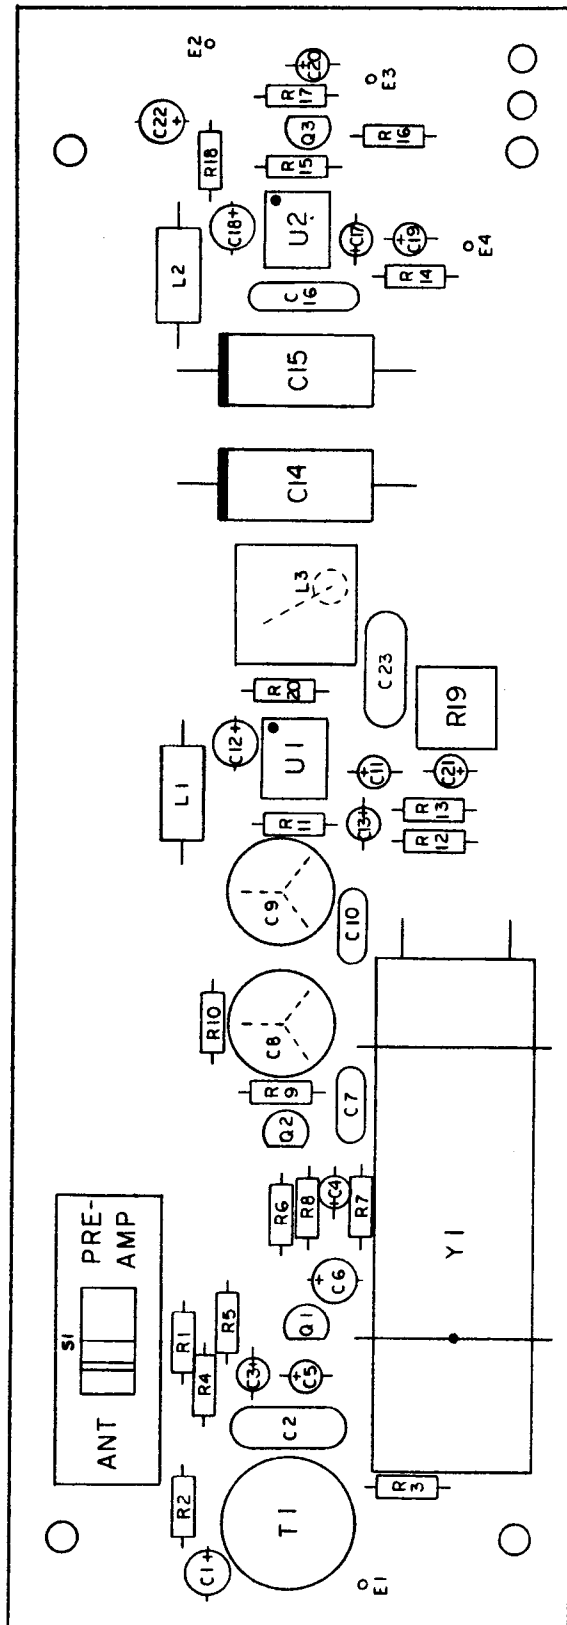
ASSEMBLY DRAWING - A1 RF AMPLIFIER
